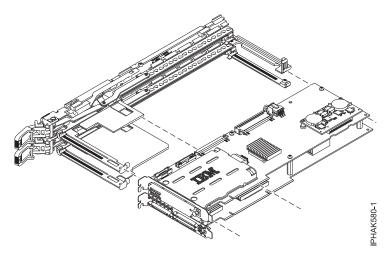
Pulling the double-wide adapter away from the cassette assembly
